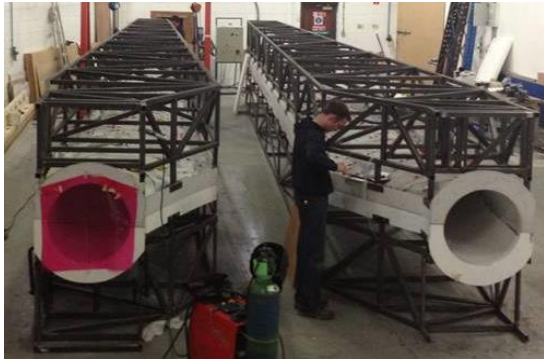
Ceramic Mould used to make 13m Wind Turbine Blades
